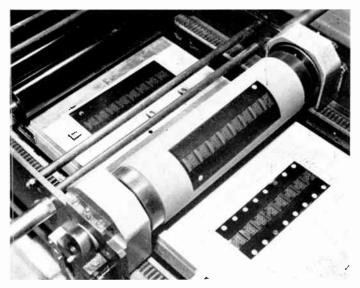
Hand-operated offset-printing press showing (foreground vacuum chuck for holding substrates and (center) cylindrical transfer blanket with ink pattern from printing plate.
